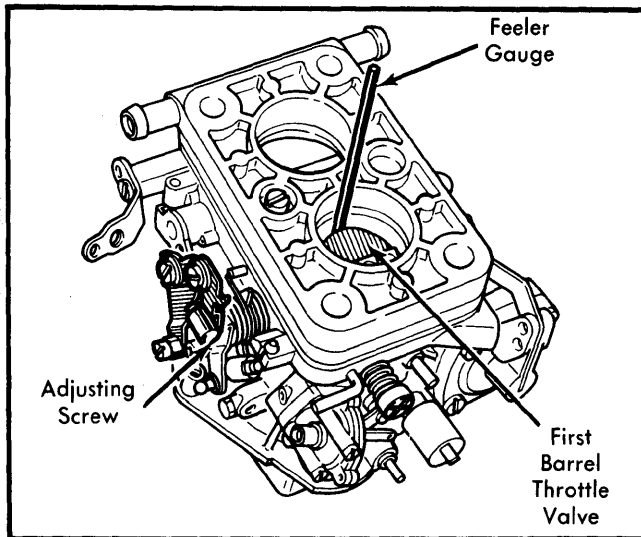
Initial Throttle Valve Opening Adjustment (California Model Shown)
